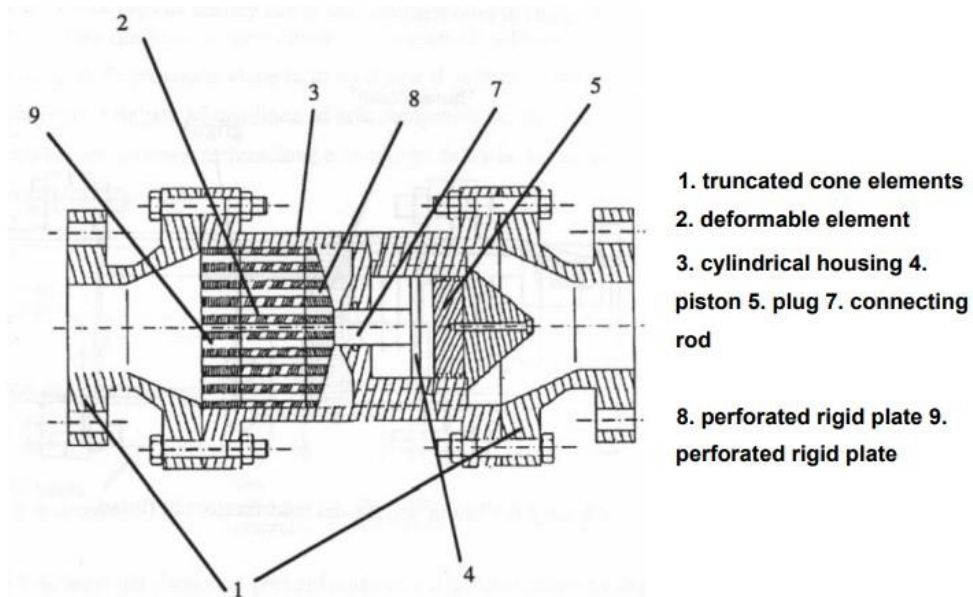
SECTION OF THE SILENT THROTTLE VALVE [9]
